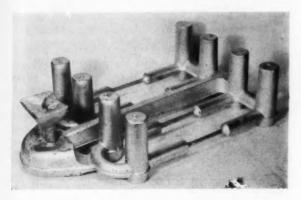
Sand casting for producing four 1/4-in. diam cast to-size stress-corrosion tensile specimens.
